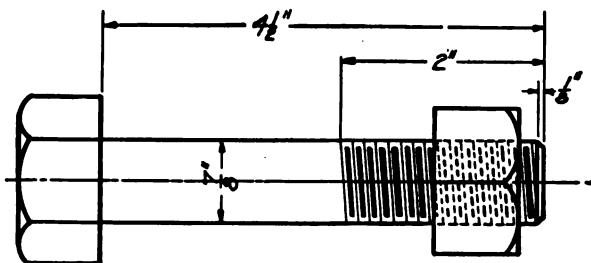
Conventional Drawing for Machine Bolt and Nut
